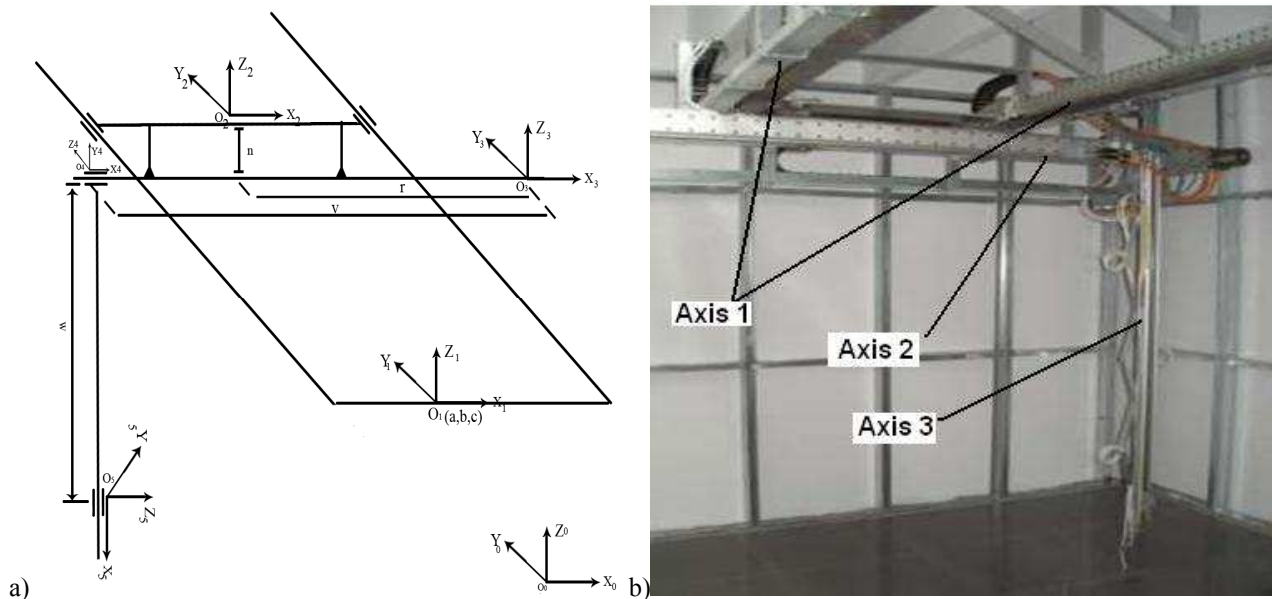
Positioning assembly with 3 translation: (a) Kinematic structure and assembling between units; (b) Practical design
